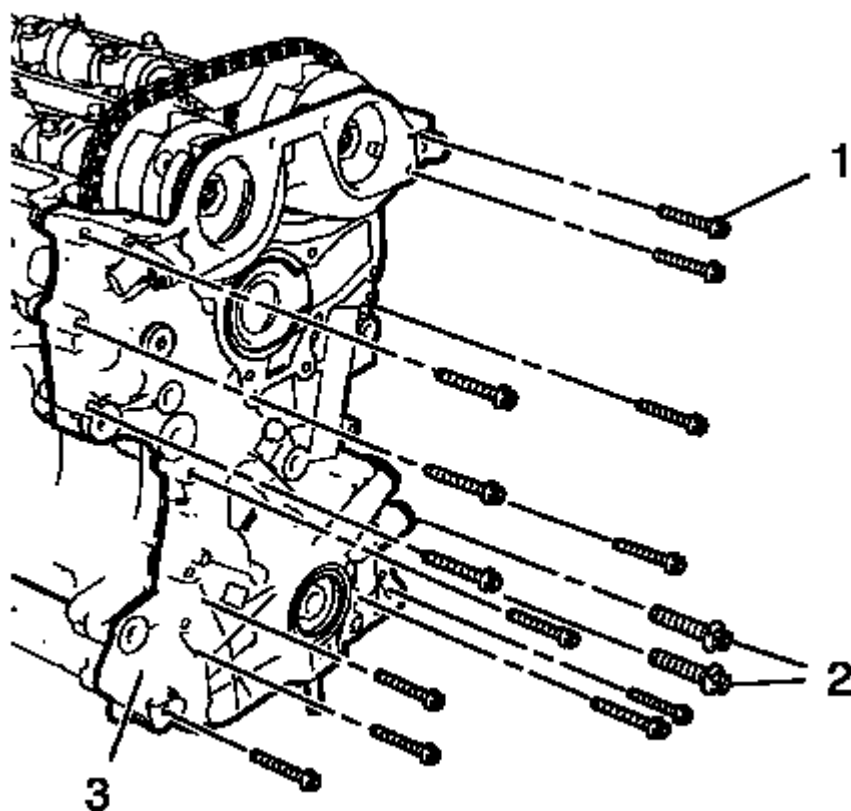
M6, M10 Front Cover Bolts And Engine Front Cover
